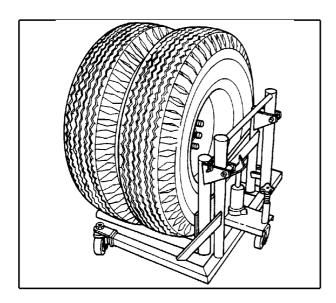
Using Wheel Dolly to Remove Wheel, Hub and Drum Assembly
